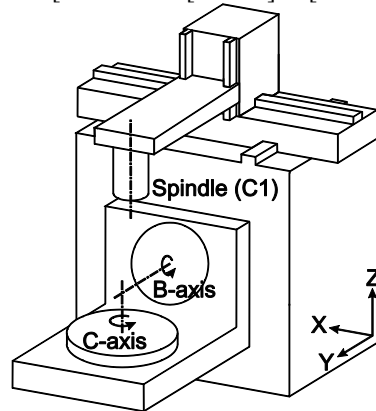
Kinematic (schematic) of the second machine tool under investigation
